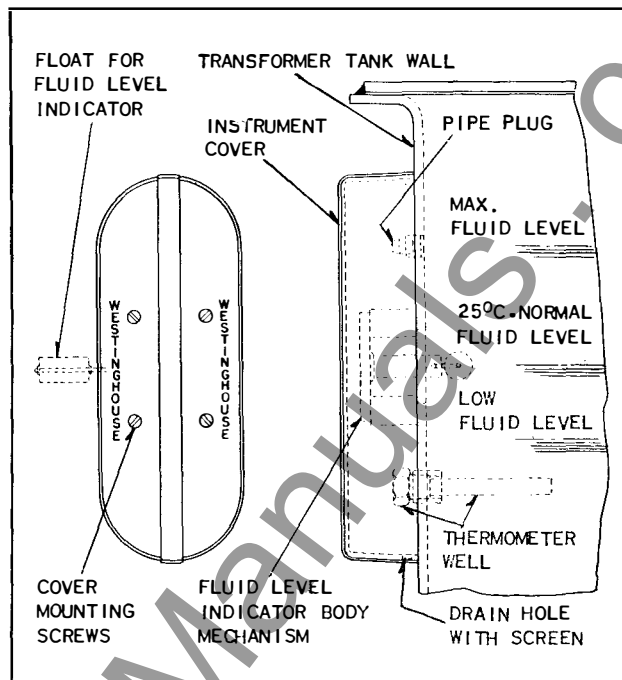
View of Extra Mounting Supplied on Some Transformers
